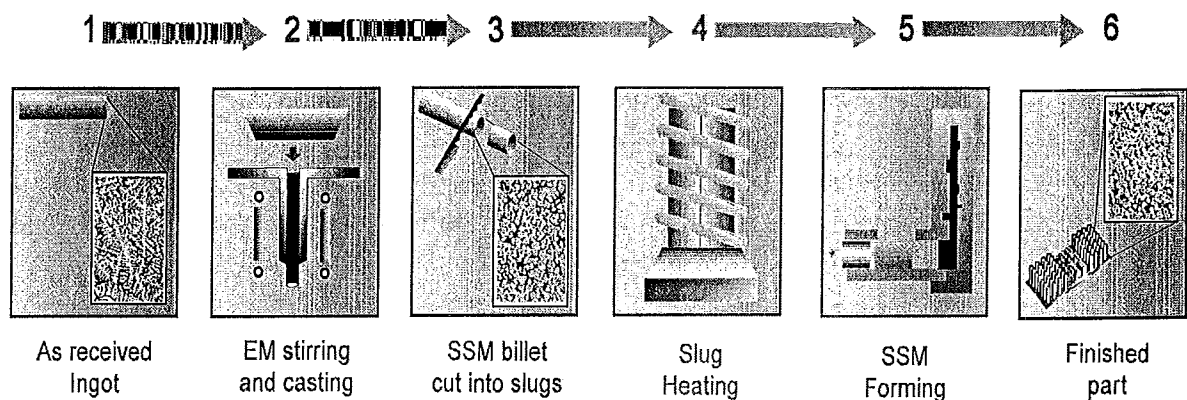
Thixocasting processing of billets obtained by Electromagnetic (EM) stirring.
